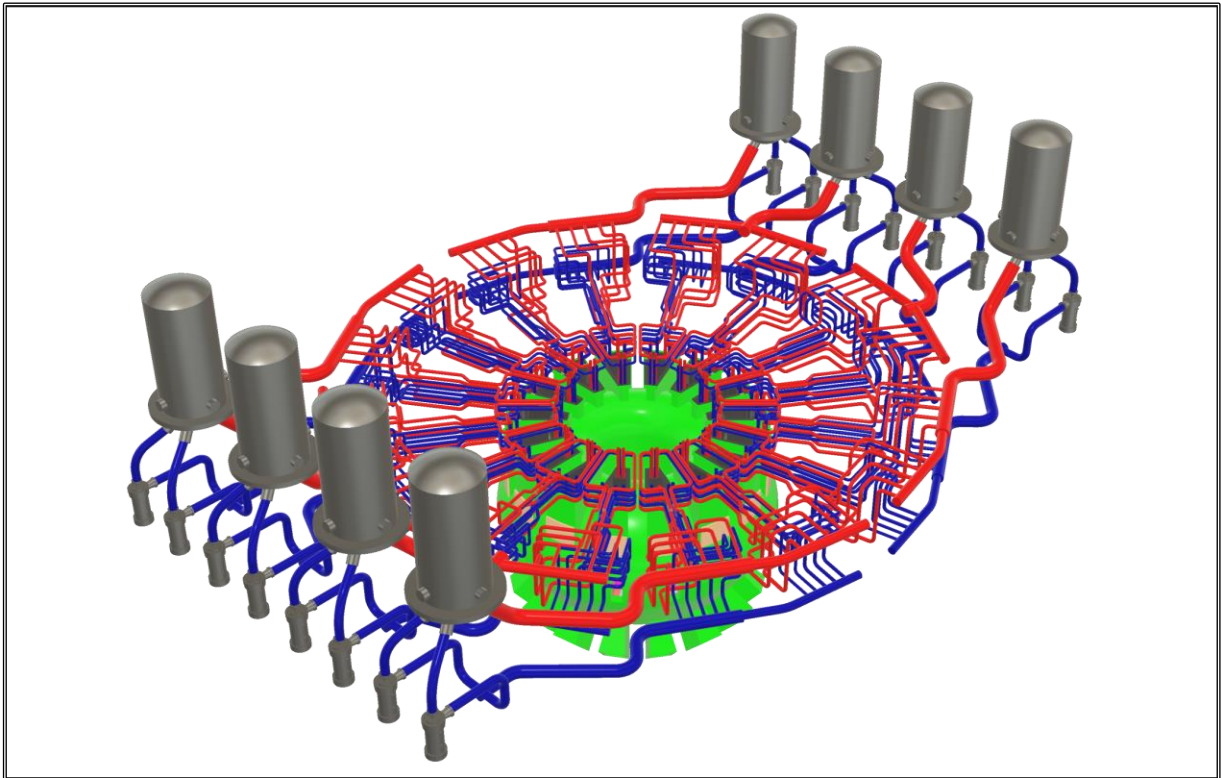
Isometric view of the BB PHTS layout – helical-coil IHX/SG configuration.
